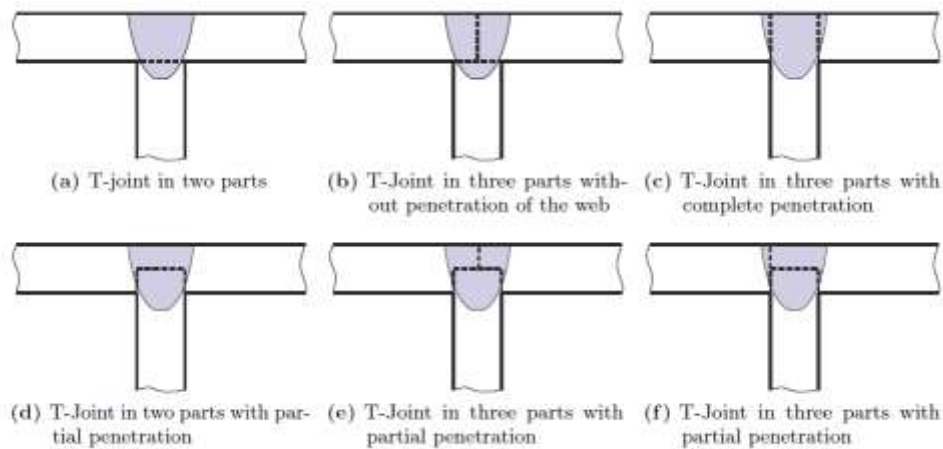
Joint design solutions for T-joints produced by FSW [5] [64].
